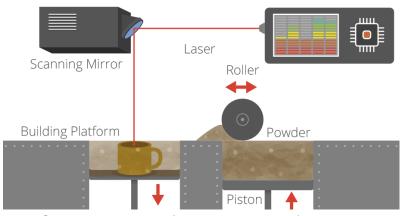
Laser Sintering Process (3D Industry 2015)
